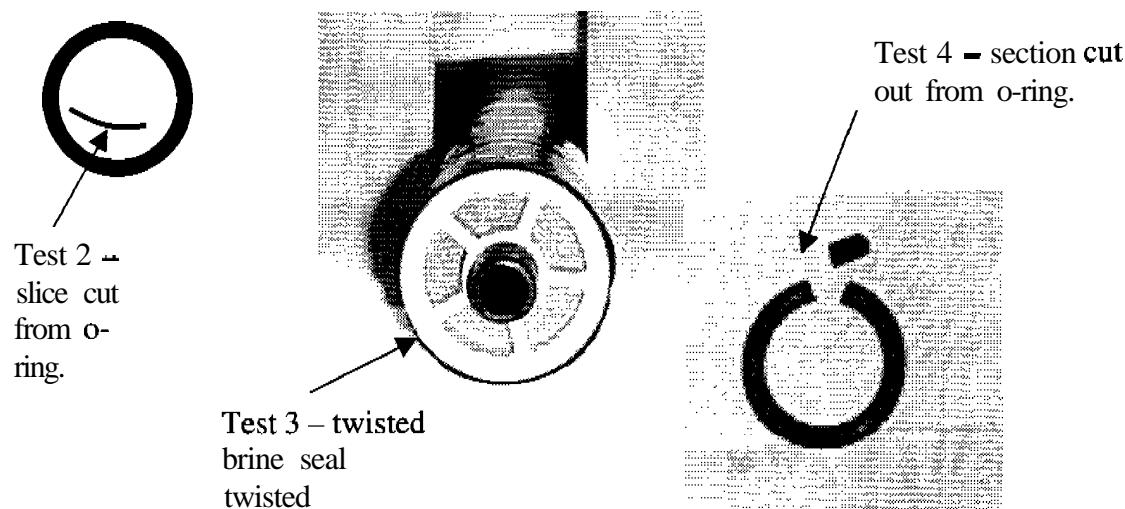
Damaged parts: sliced o-ring, twisted brine seal, cut o-ring
